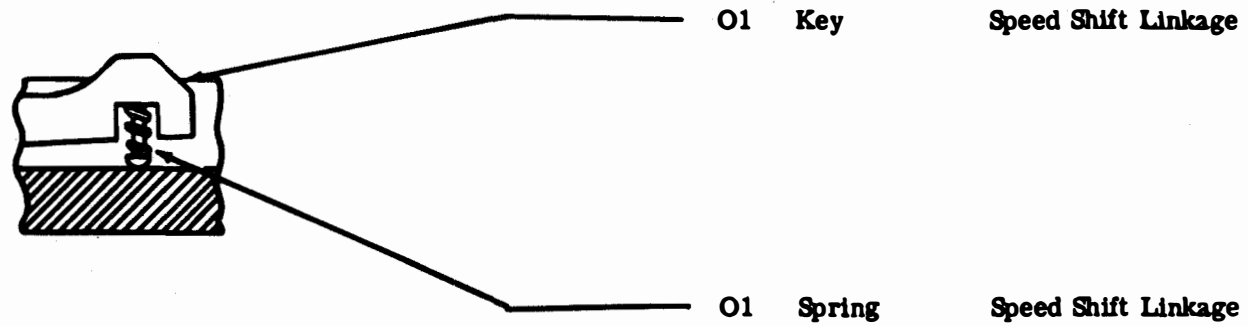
Gearshift Mechanism for Tape Printer Keyboard
